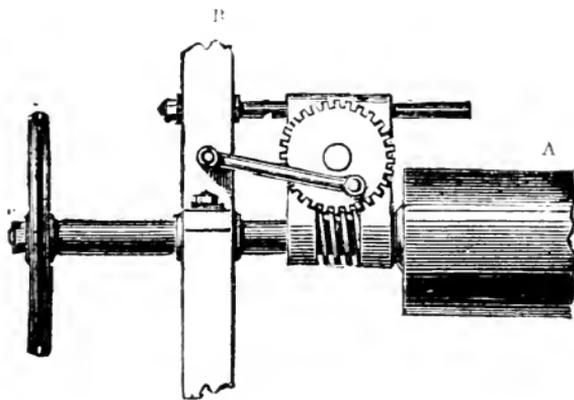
A, Ink-drum ; B, Frame of Machine.
